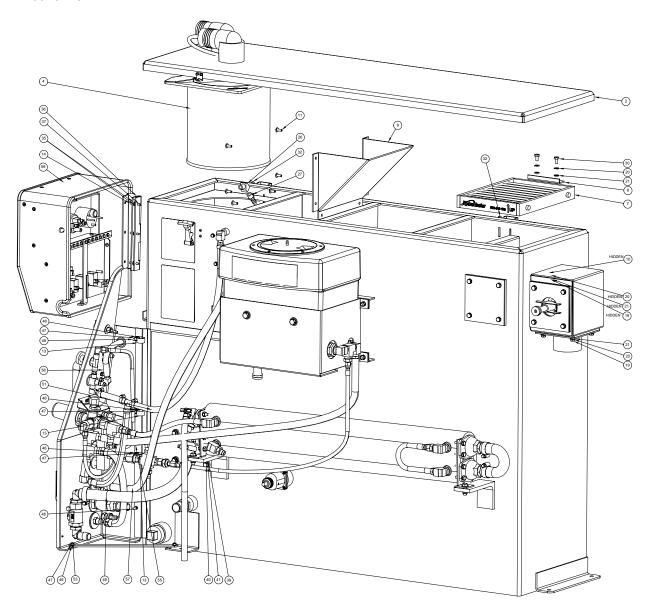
CDS 4.6 Recovery Tank Assembly - Rear View D-6978 Rev -
